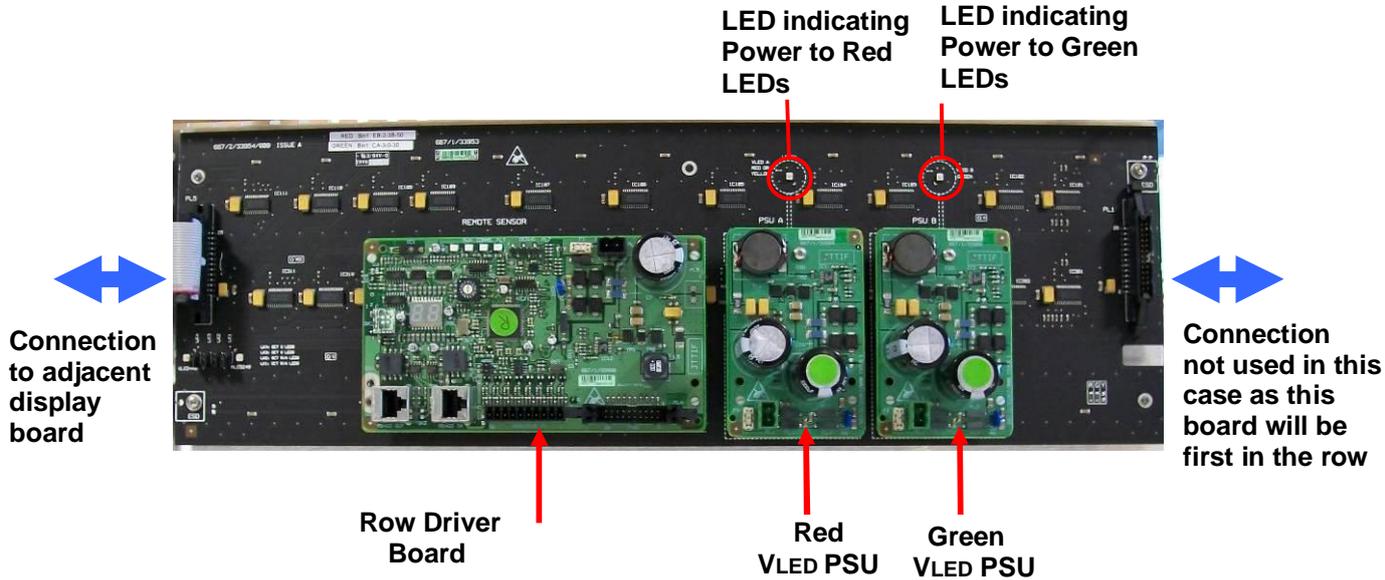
160mm Character PCB Assembly (Red/Green) Full Matrix – Viewed from Rear
